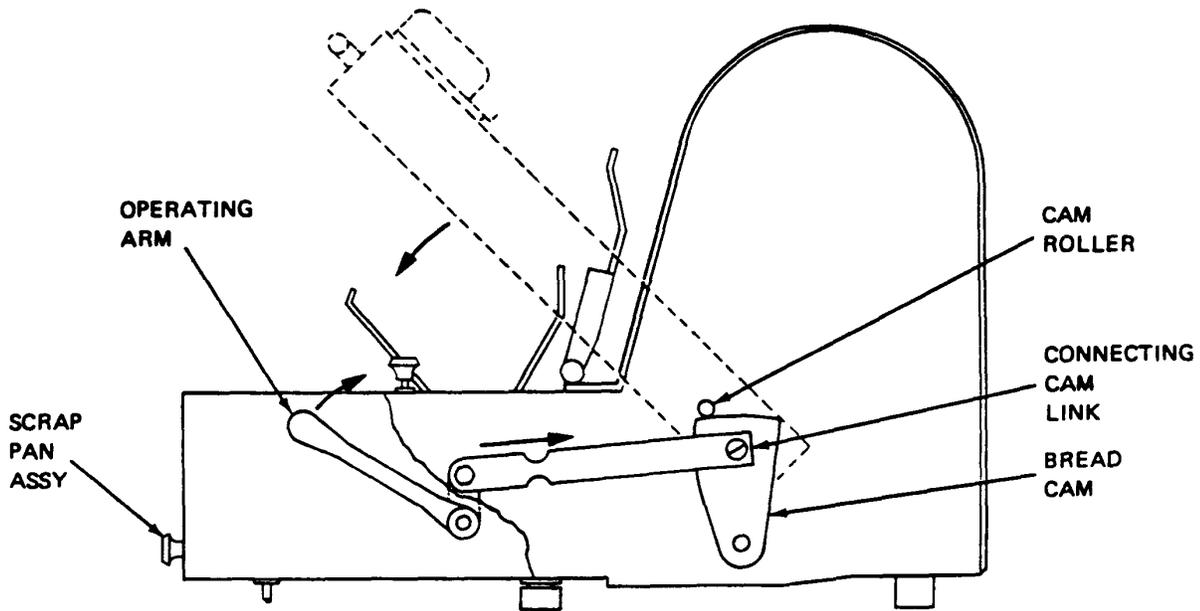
Cams, Linkages, and Scrap Pan Assembly
